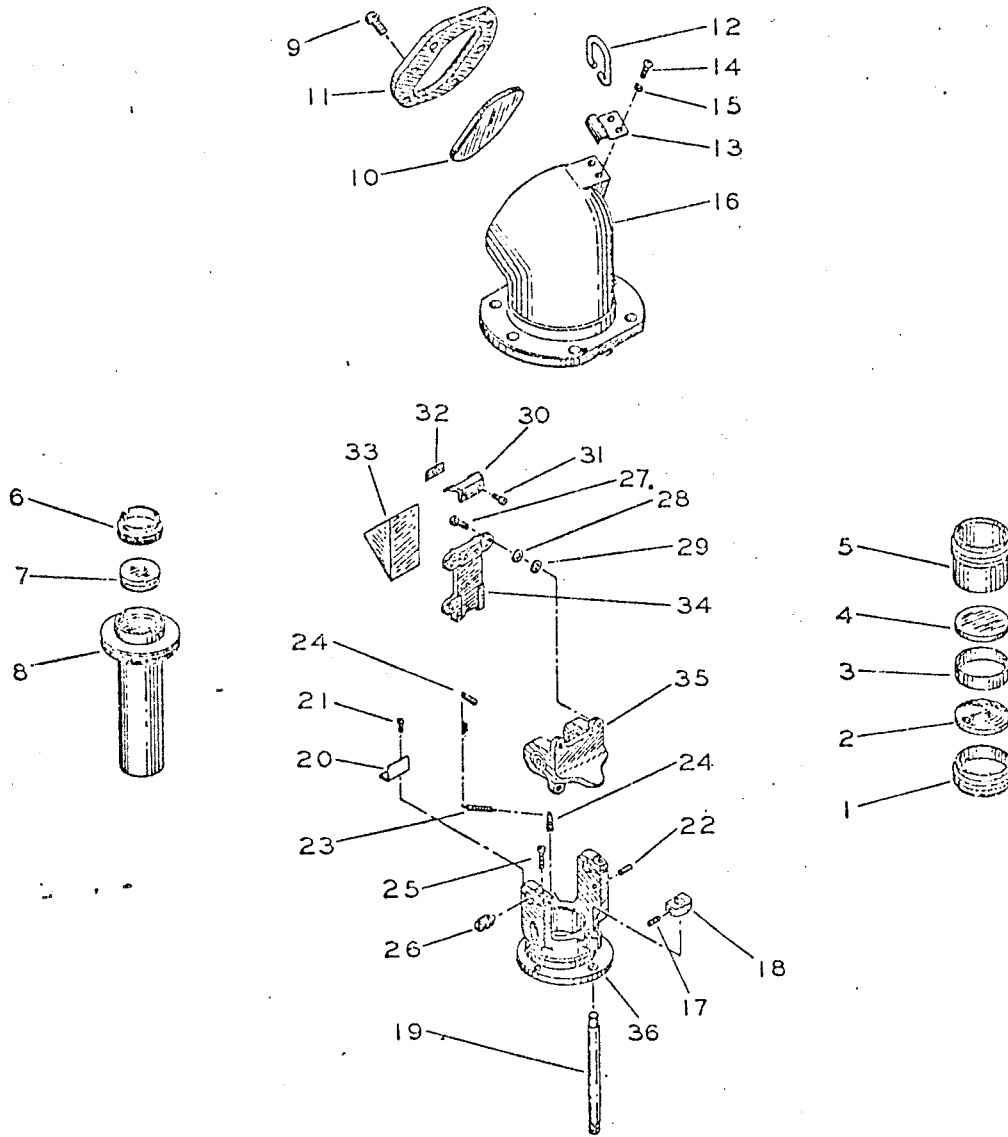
Condenser Lens Assembly, 1st and 2nd Objective Lens Assembly, Index Housing Assembly, and Index Prism Mount Assembly
